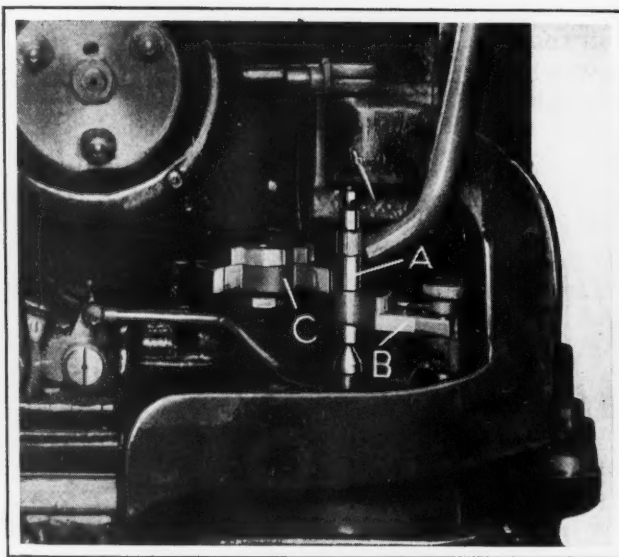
Machining a Cylindrical Surface on a Shock Absorber Camshaft, in a Fellows Gear Shaper
